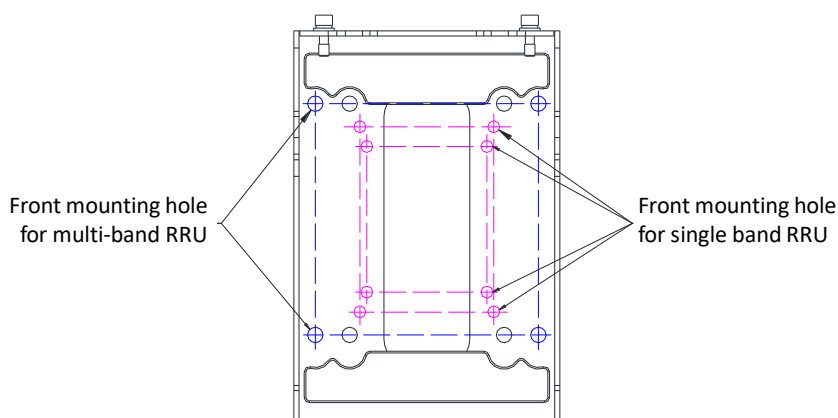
Bracket 1 Mounting Hole of Front Mount
